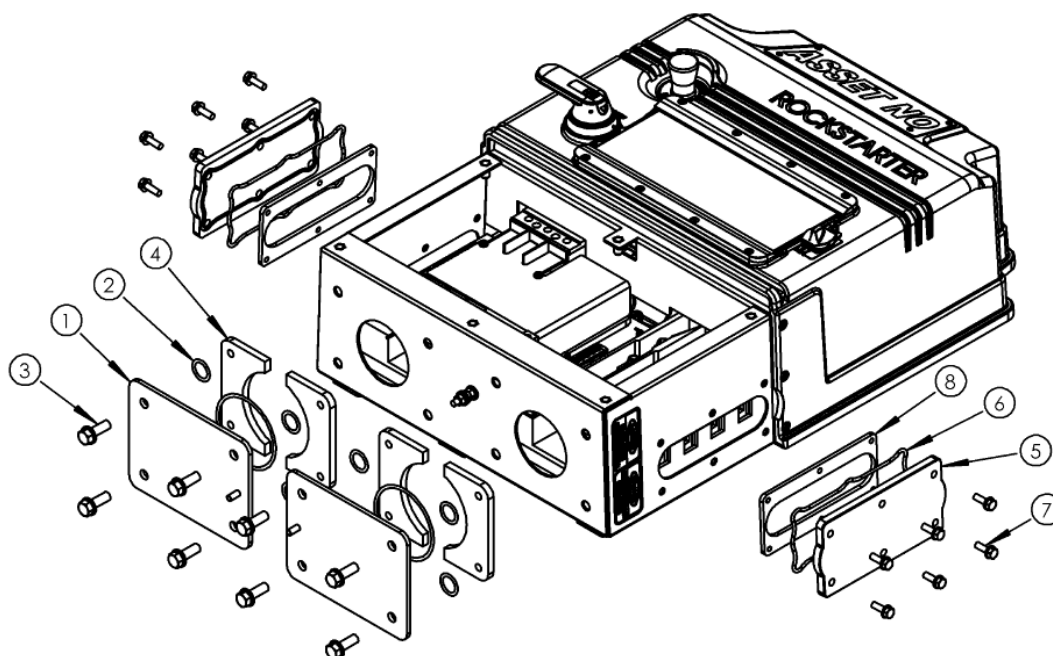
Rockstarter Gland Plate & Feed Through Kits
